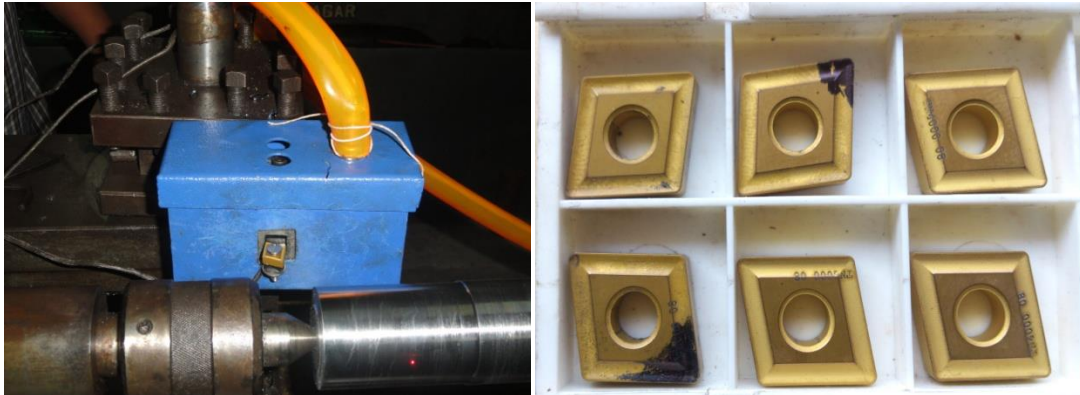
Cutting Tool (CARBIDE INSERT)
